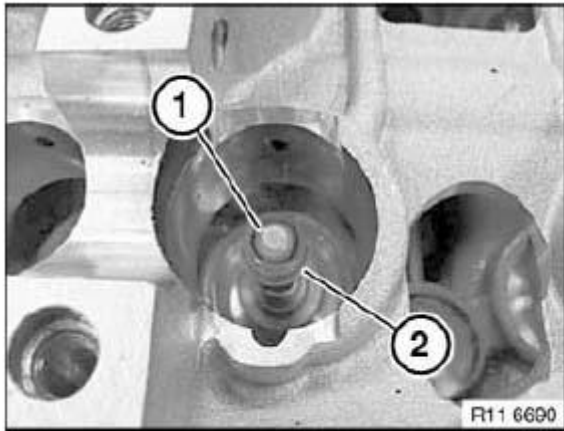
Identifying Valve Stem Seal And Mounting Sleeve
